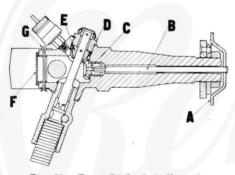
Front Right Spindle and Speedometer Driving Gears.
